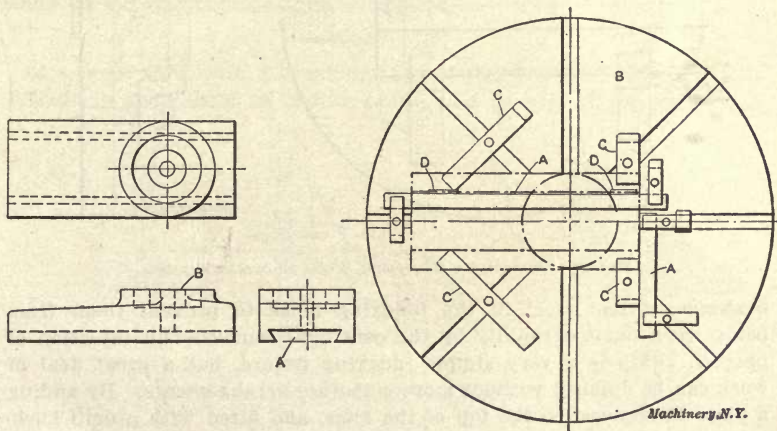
Milling Fixture in which Work is Located from a Previously Bored Hole
